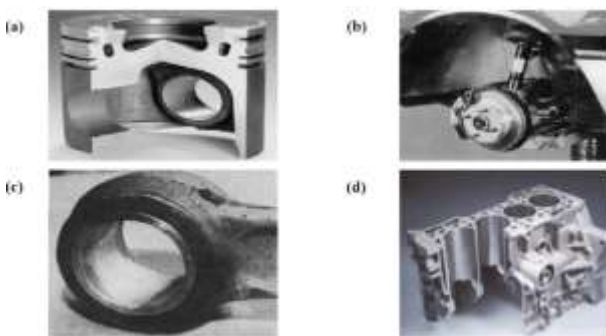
Application of Stir Casting (a) Piston, (b) Automobile disc brake, (c) Connecting rod, (d) Engine frame[63].
